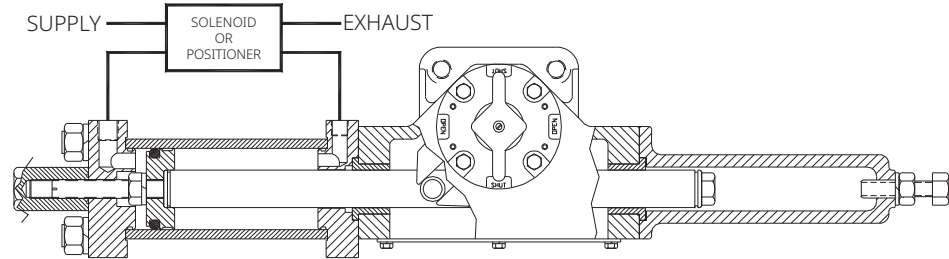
Single-Acting Spring-Return Two Pistons - Model HP65 Series
